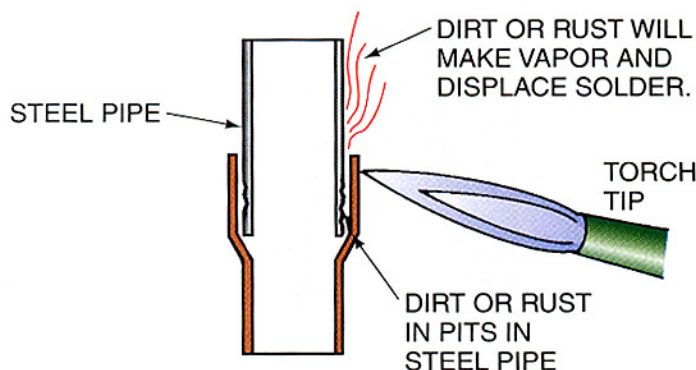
Dirt trapped in pits will expand when heated and cause leaks.
